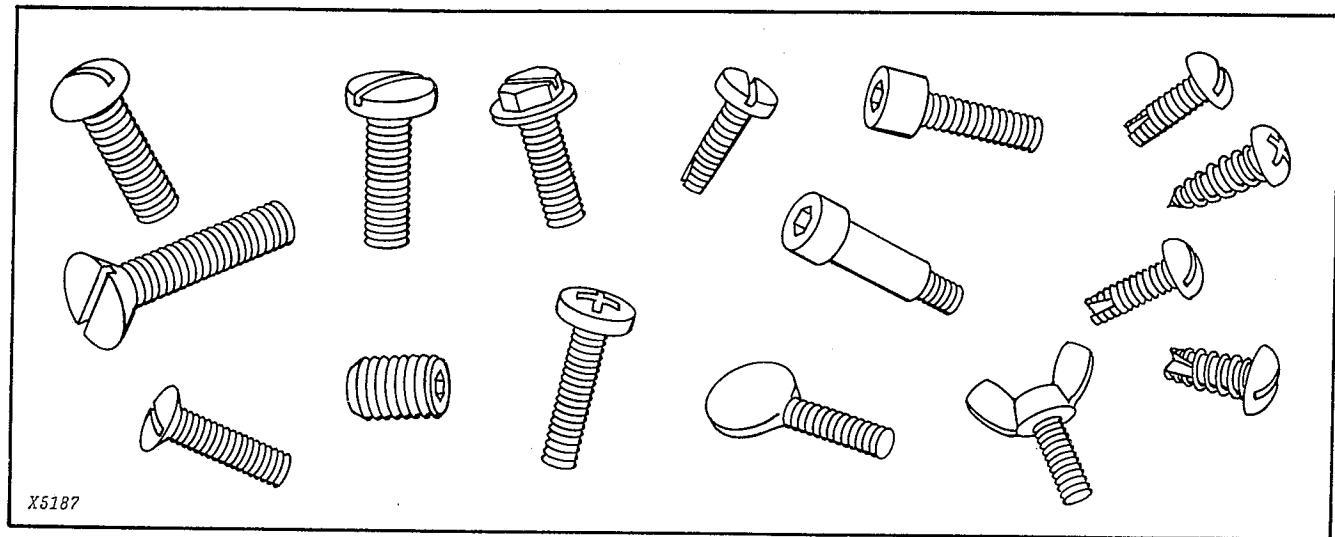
There Are Screws of Many Shapes and Sizes for Many Purposes.
